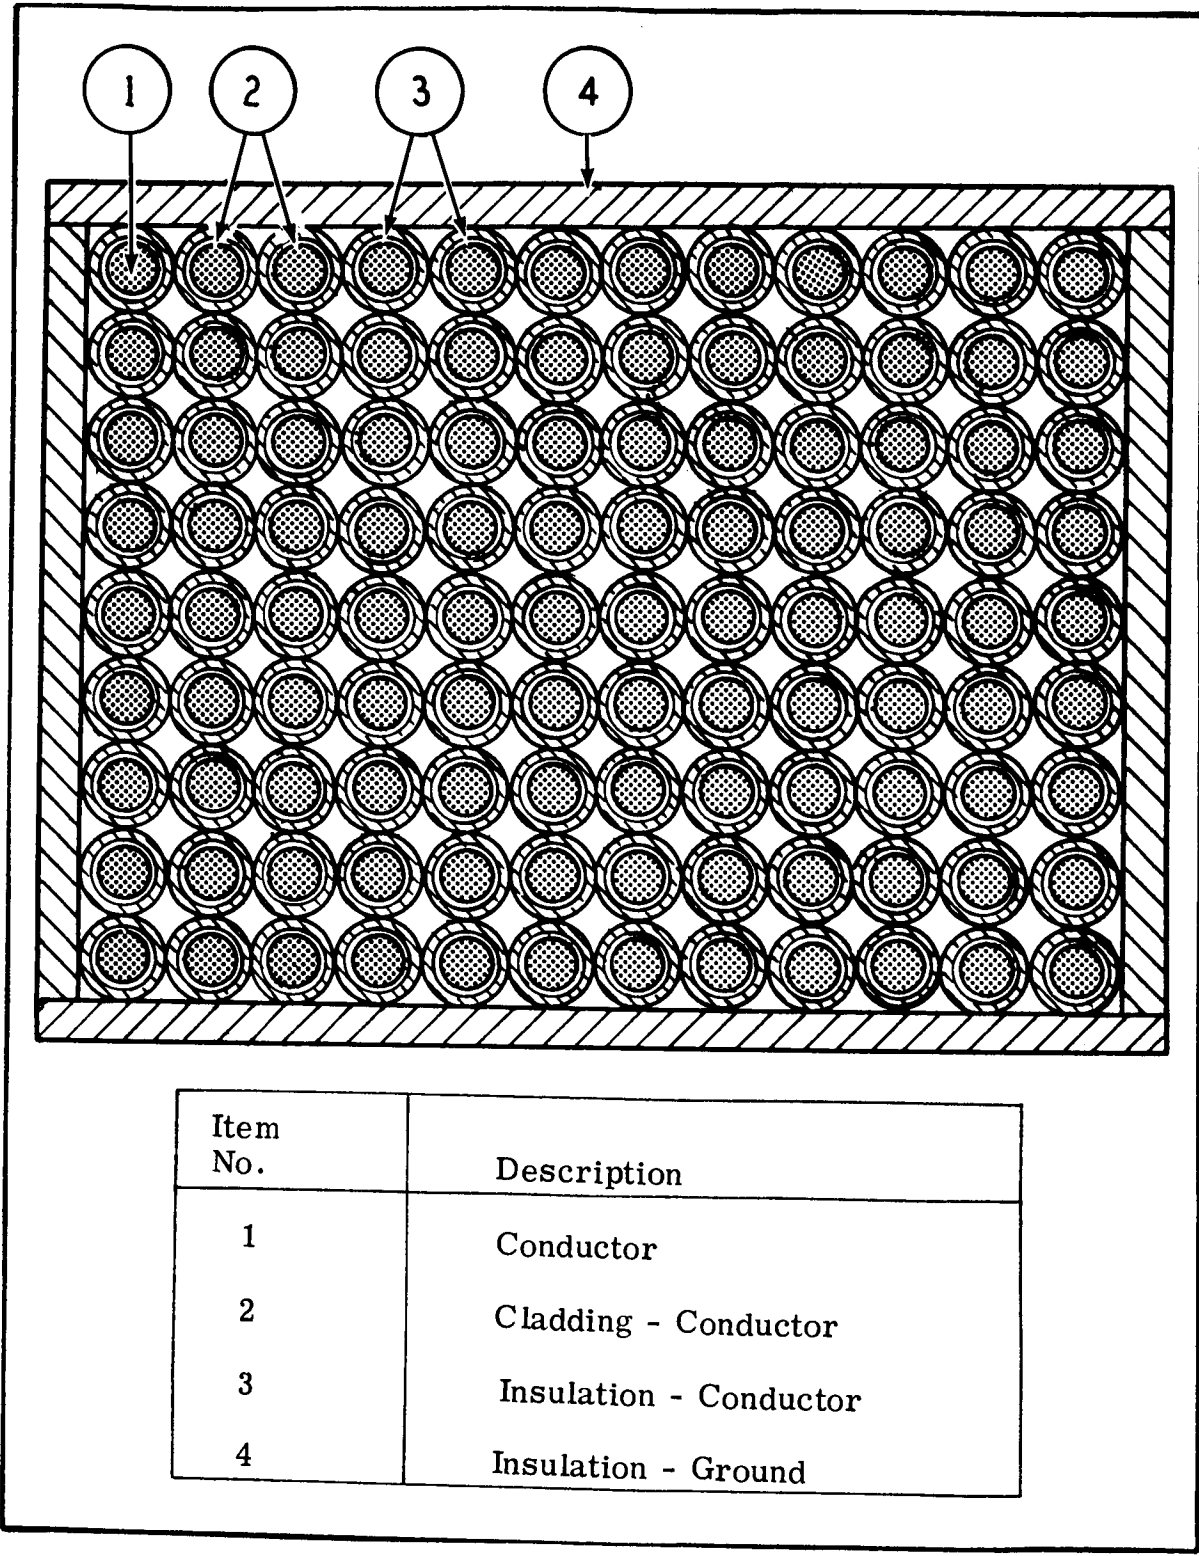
Solenoid, Assembly and Cross-Section
